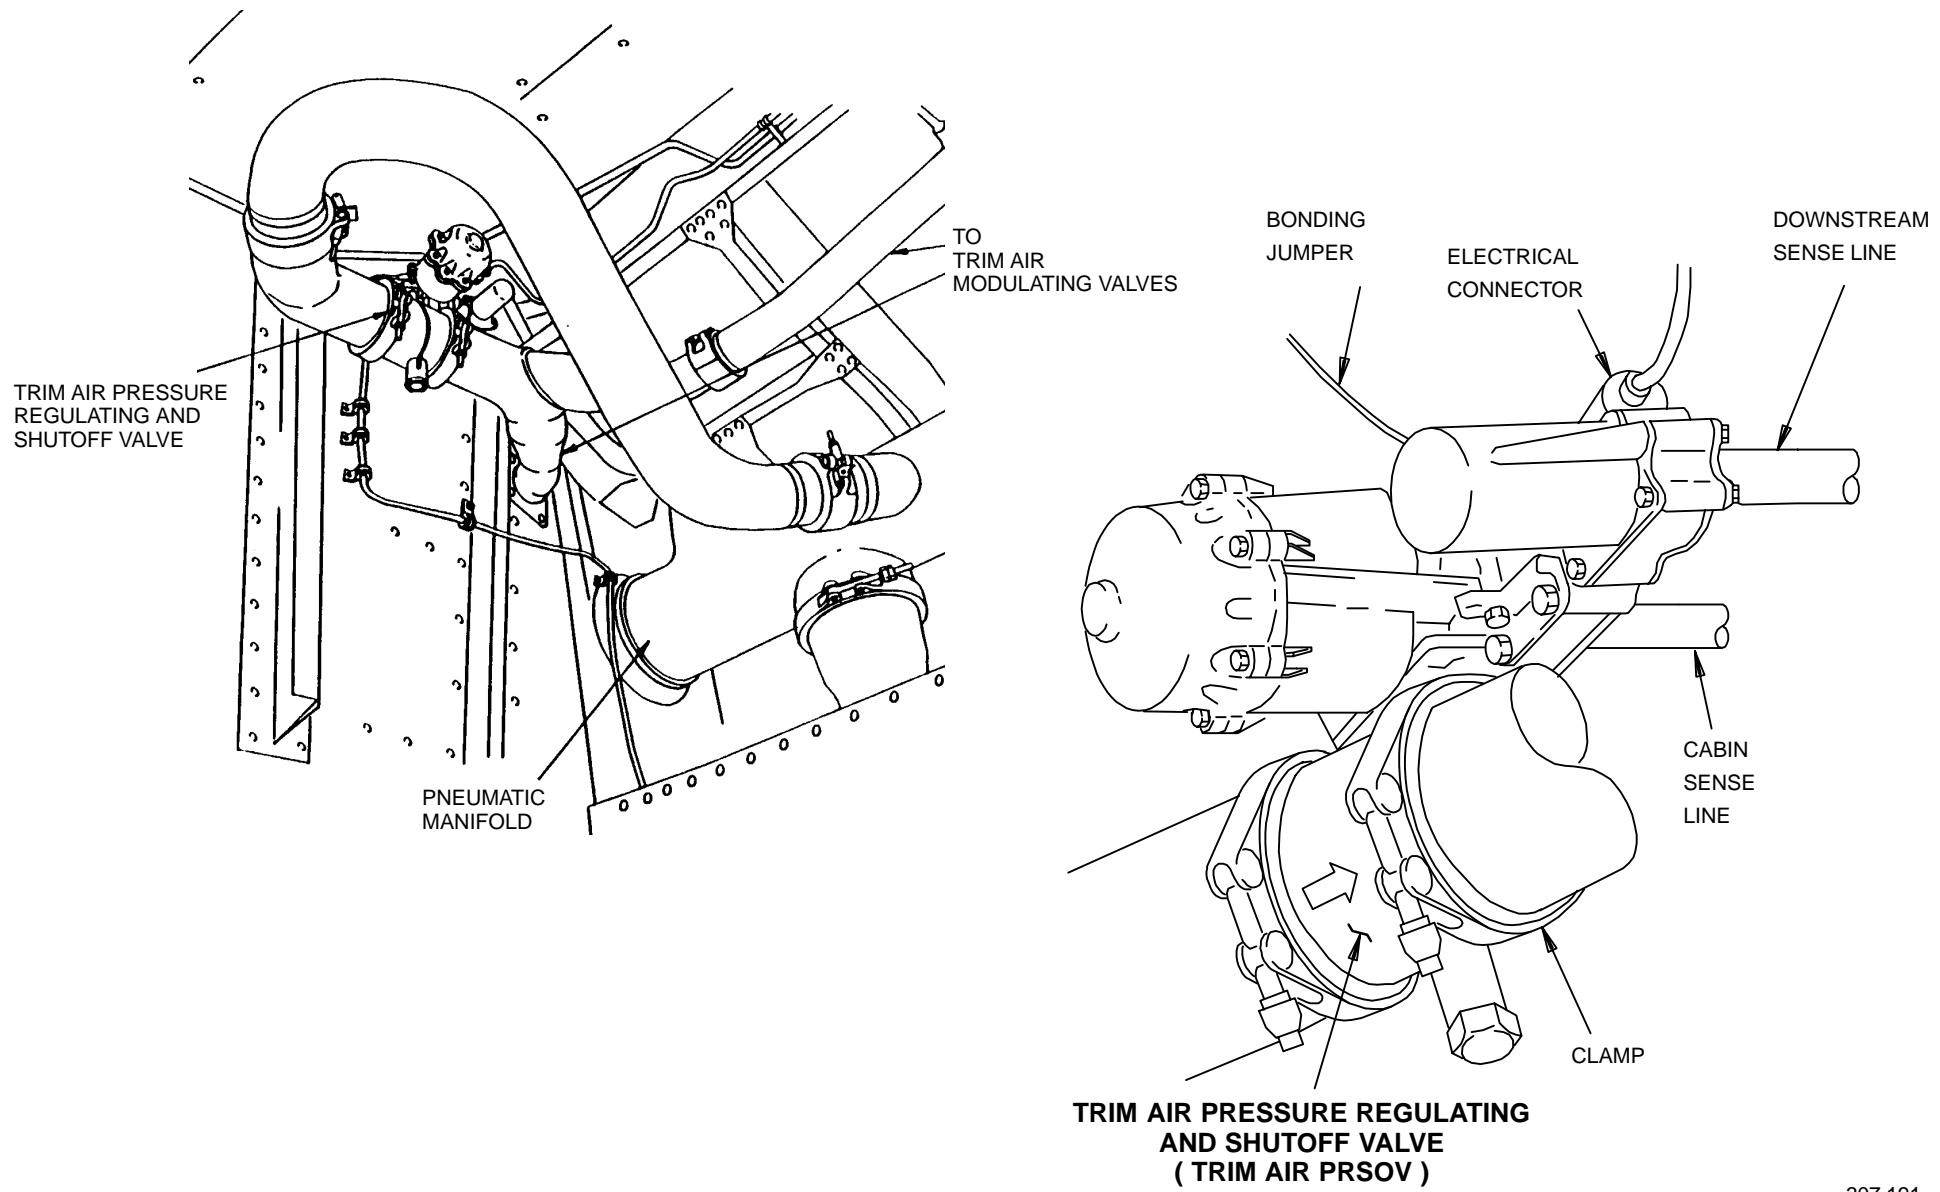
TRIM AIR PRESSURE REGULATING AND SHUTOFF VALVE
